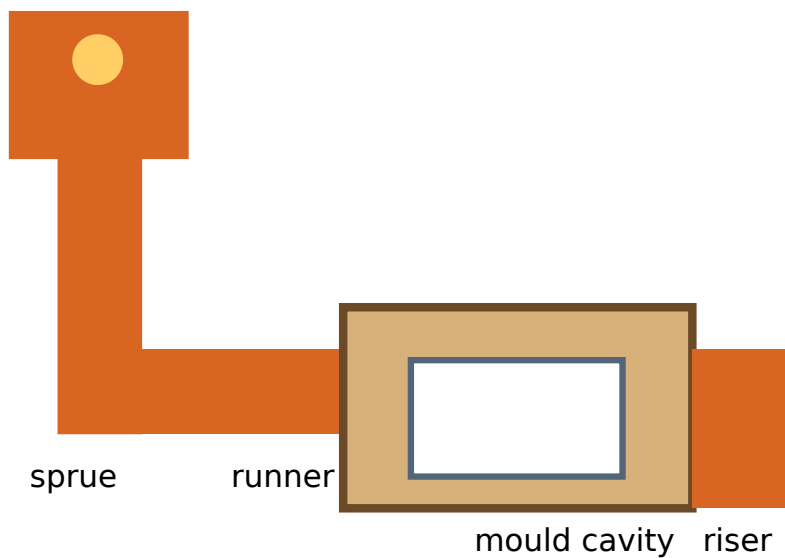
Sand casting system. Reproduce the essential parts, labels and arrows in examination drawings.
